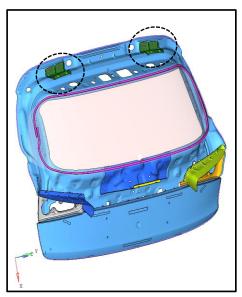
Z type hinge bracket which is assembled with screw to outer sheet metal
